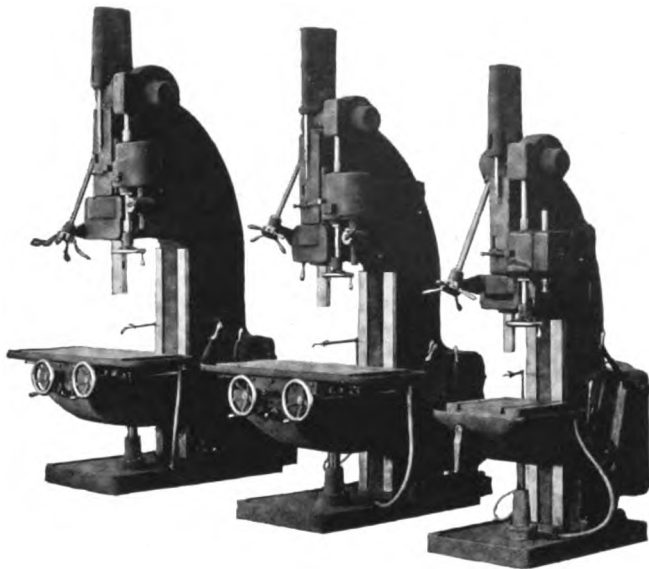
No. 4—36-Inch Machine (Compound Table). No. 3—36-Inch Machine (Compound Table) No. 2—24-Inch Machine
